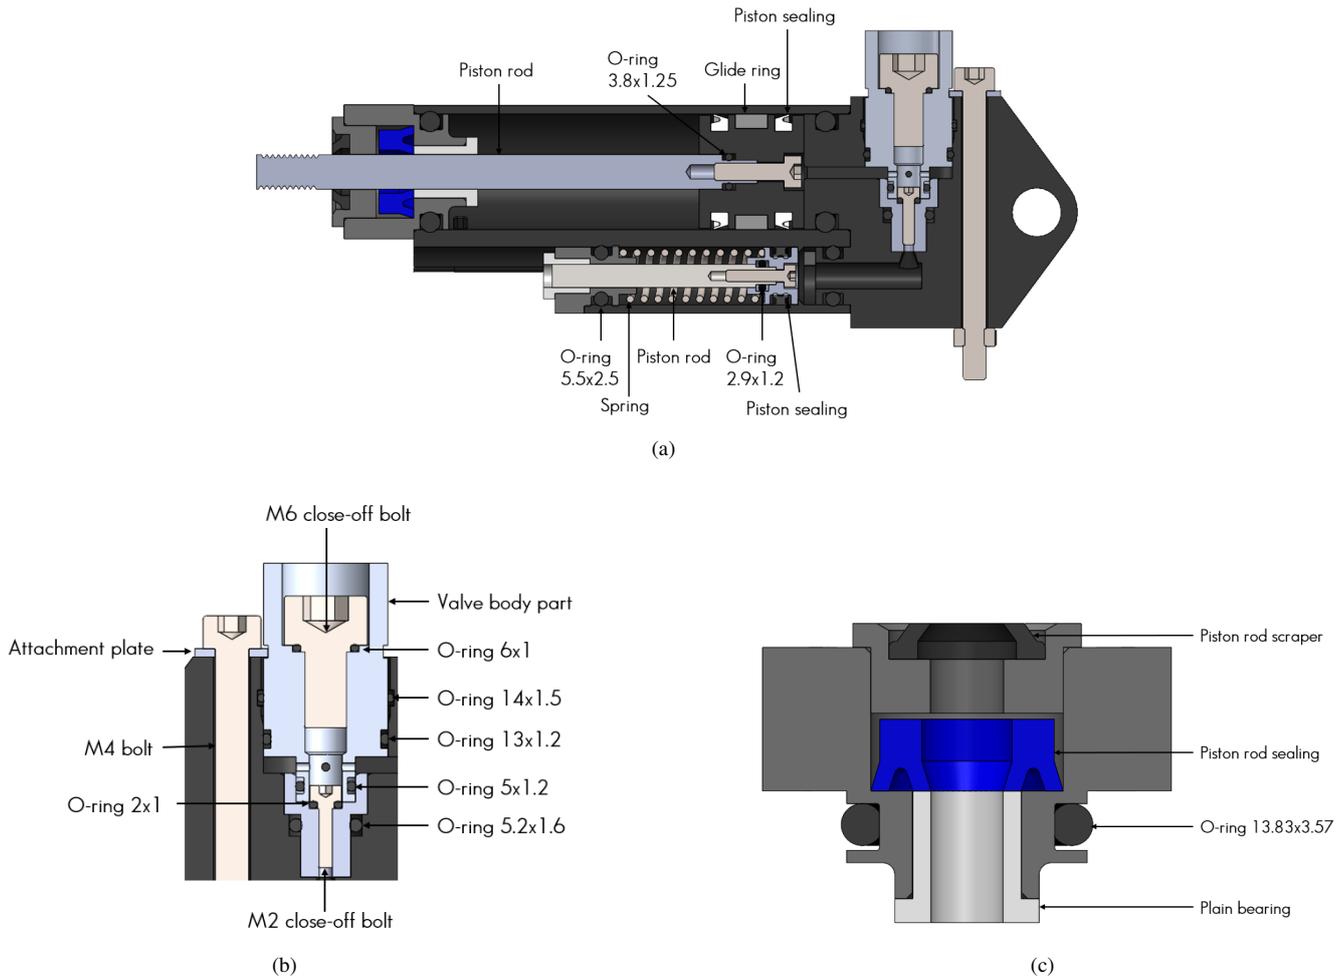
(a) Section view of the 3D-printed hydraulic cylinder with annotations of the piston rod assembly and the accumulator assembly (b) Section view of the valve assembly with annotations of the different valve parts (c) Section view of the cylinder head assembly with annotations of the different seals and parts.
